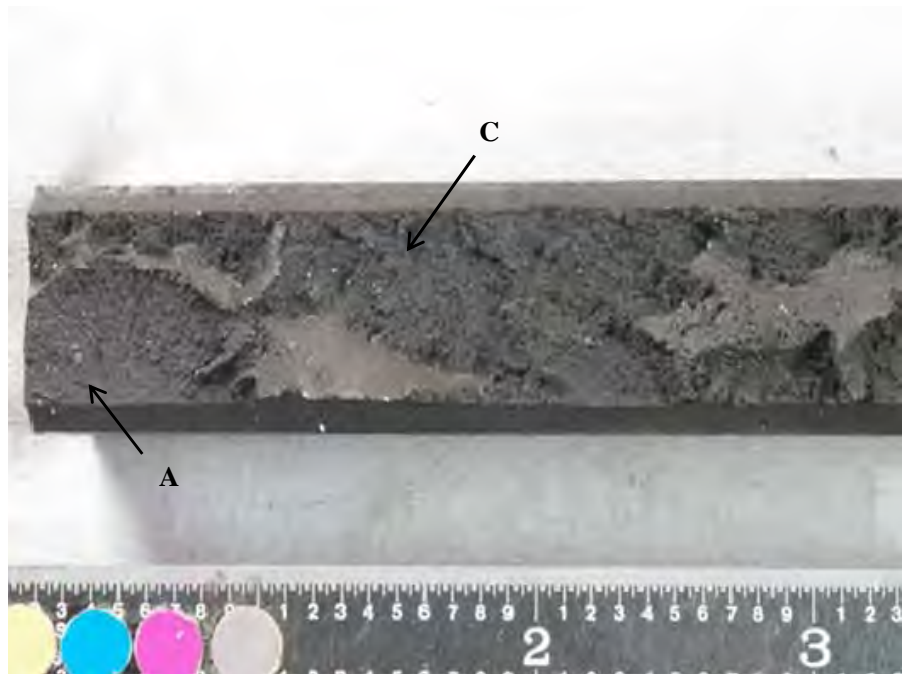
Close-up photograph of fracture surface from SID 14875 "B4" subsegment identifying two areas examined by scanning electron microscope.
